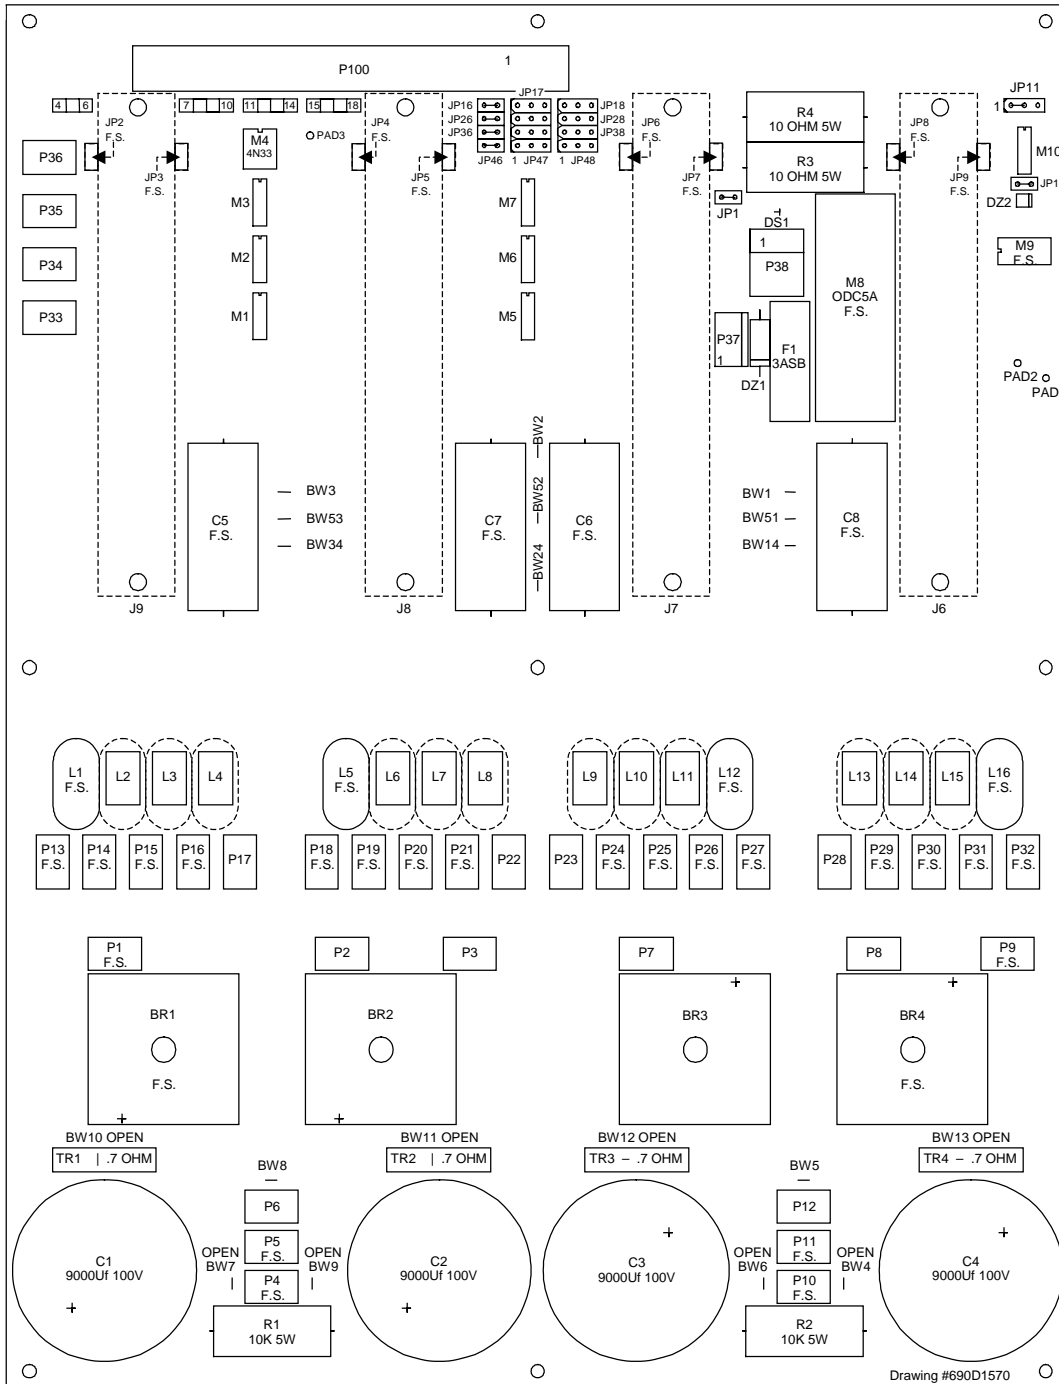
DR800 Drive Interface Board Jumper Locations
